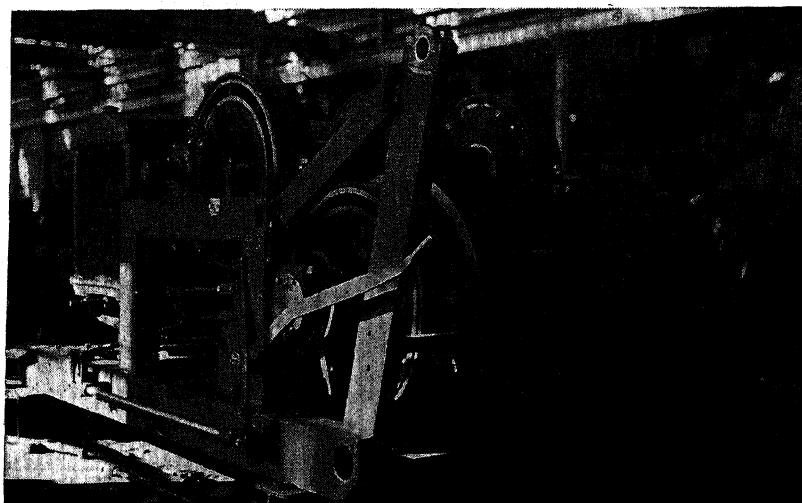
Rotary draw-works of welded steel construction in the course of manufacture.
